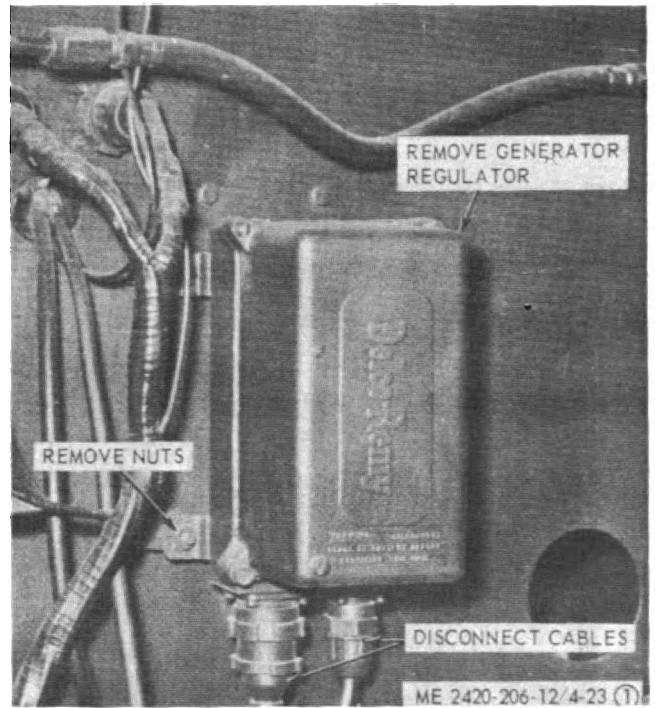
Generator regulator, testing, removal and installation (sheet 1 of 2).
